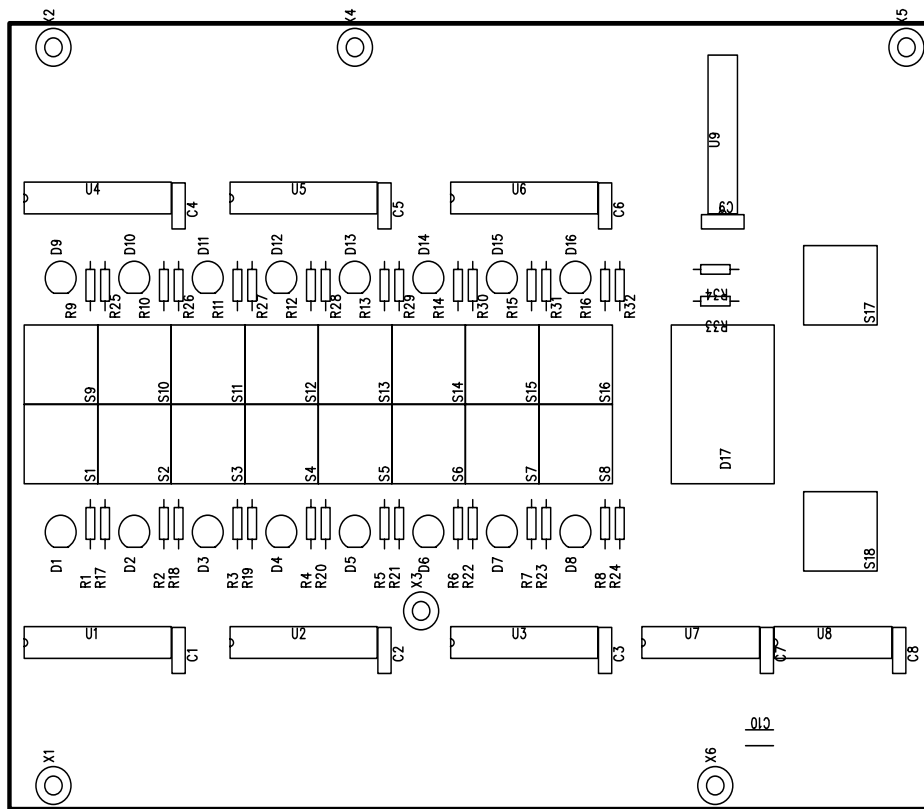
Output assign module PCB, silkscreen/assembly drawing.
